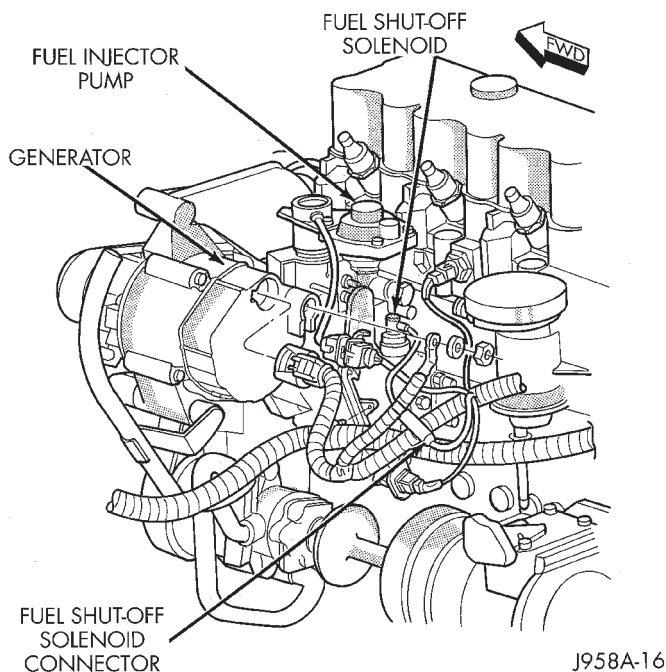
Fuel Shut Off Solenoid Connector- Diesel Engine
